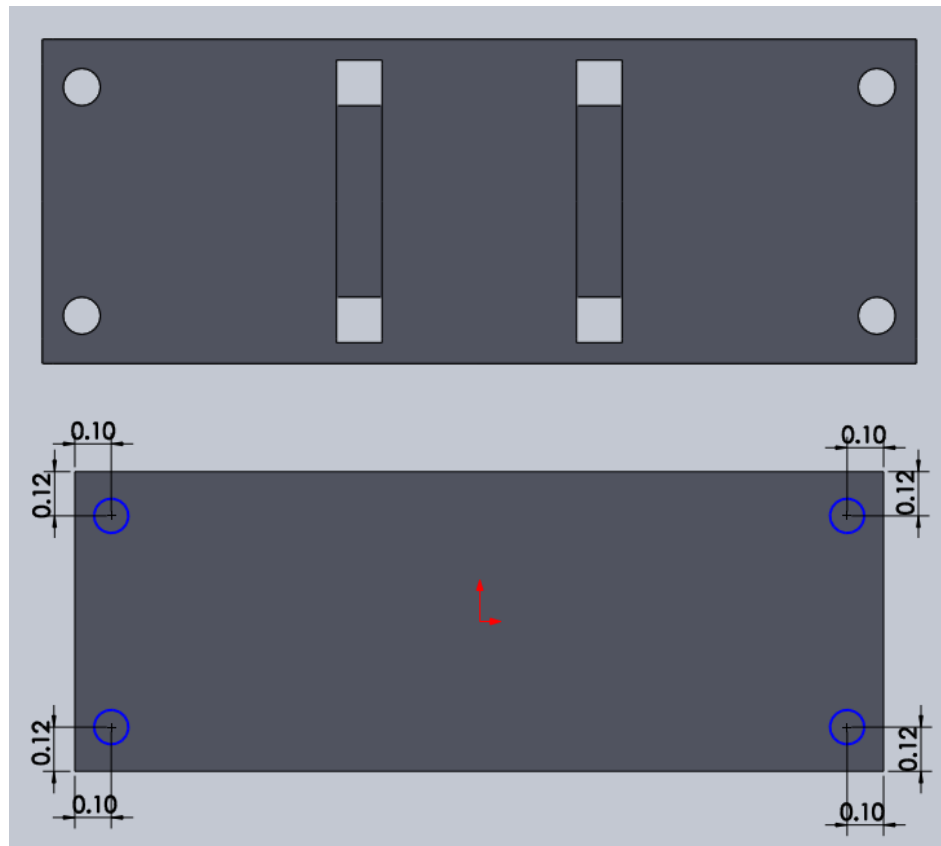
Top view and dimensions of design drawing of 3D printed layer v1.0
